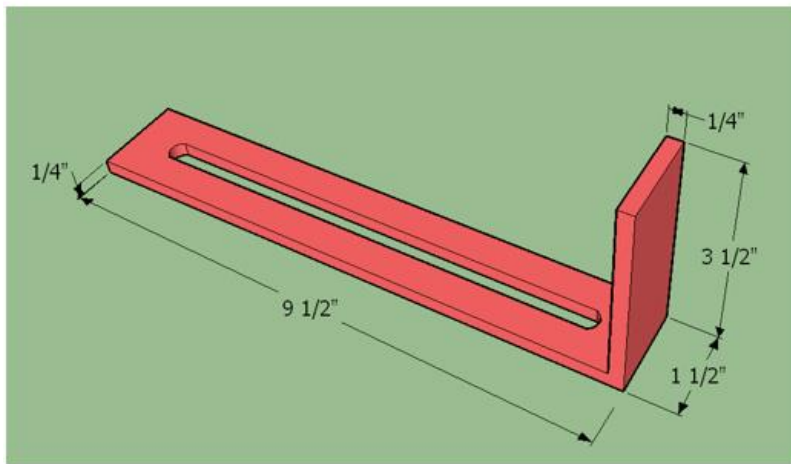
Gripper (L1)- Sample Holder of Rectangular Specimens.
